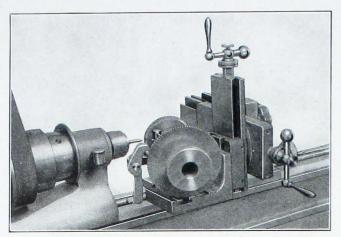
Milling Attachment Index Head on Angle Iron and Milling Attachment Graduating Bevel Dial.
